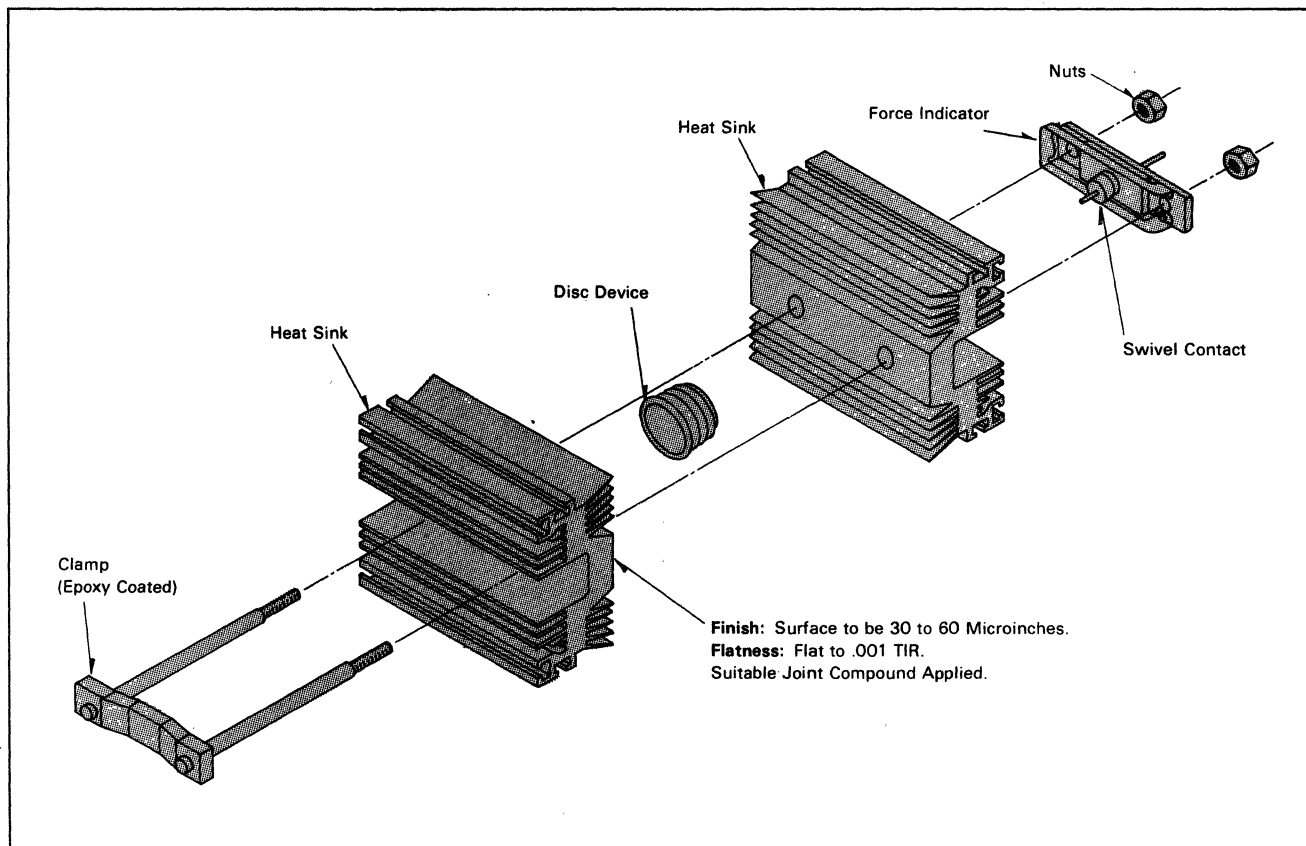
Mounting Procedure For Disc Mounted Devices (Exploded View).
